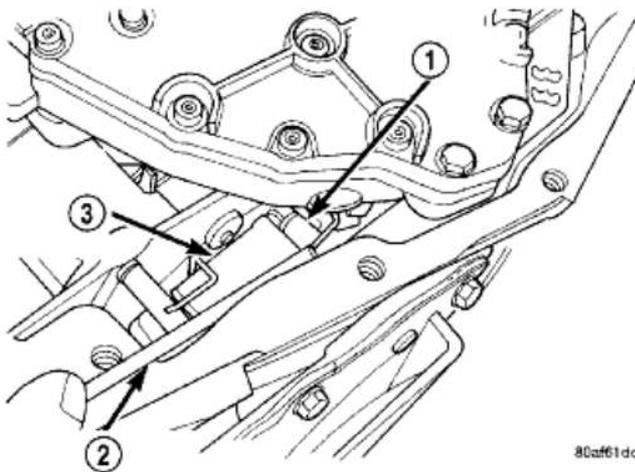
Identifying Push Park Rod Rollers & Guide Bracket
